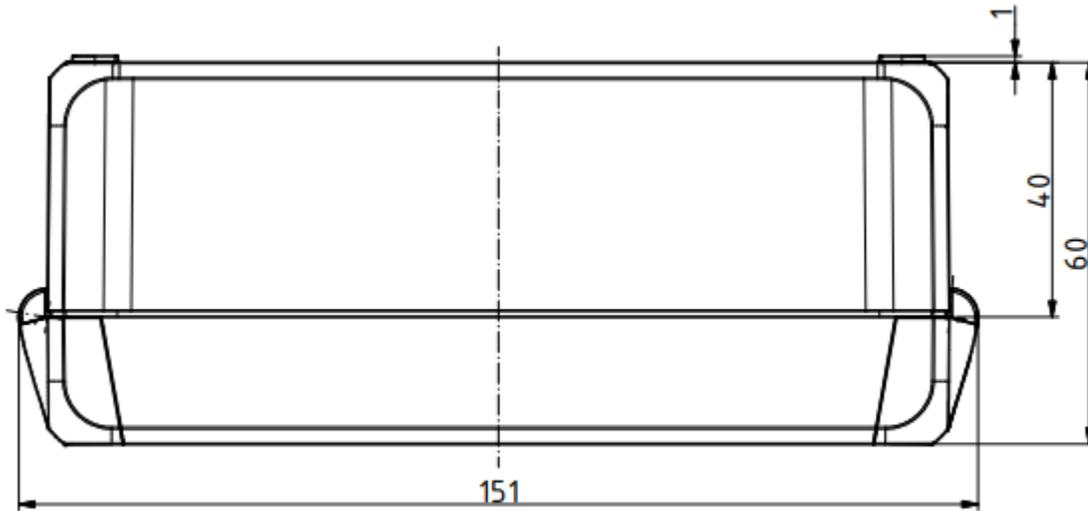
DL222 WATERTIGHT ENCLOSURE OUTSIDE DIMENSIONS
